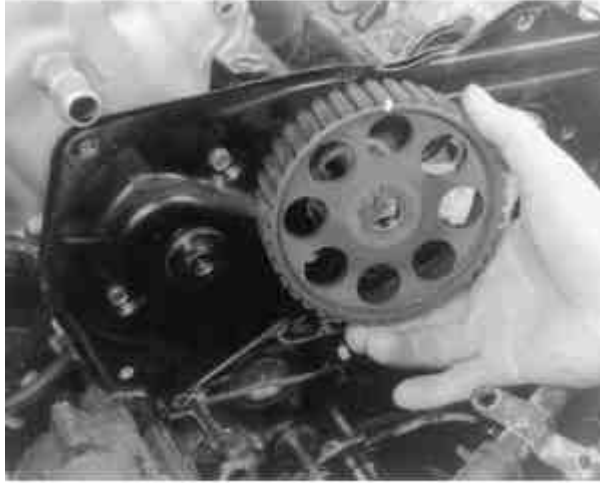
Tighten the camshaft pulley retaining bolt — note the tool to hold the pulley in place
